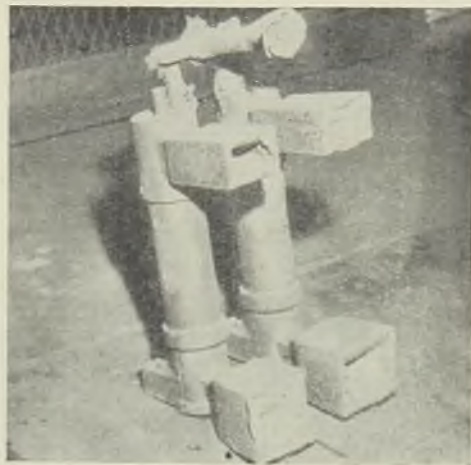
TYPICAL STEEL CASTING WITH RUNNER AND RISERS.
